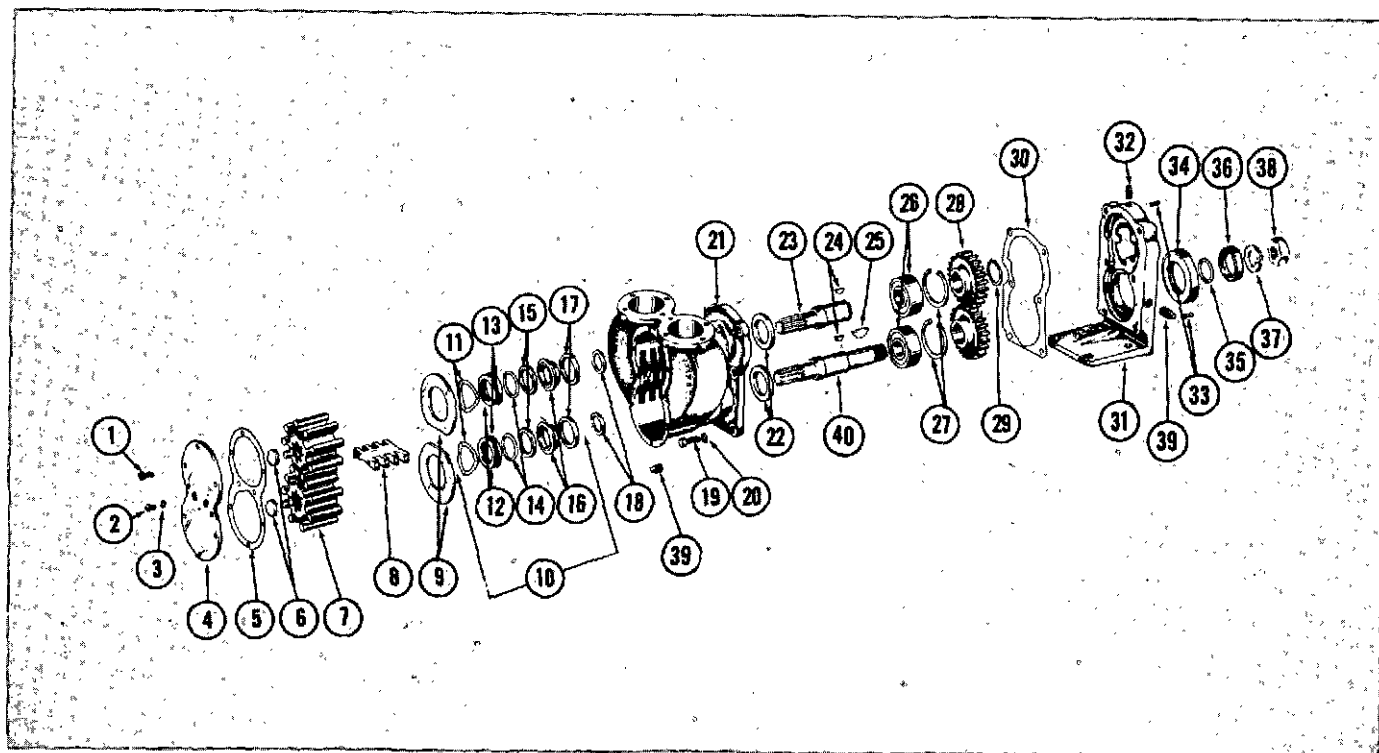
, V40816. Sea Water Pump — Exploded View
